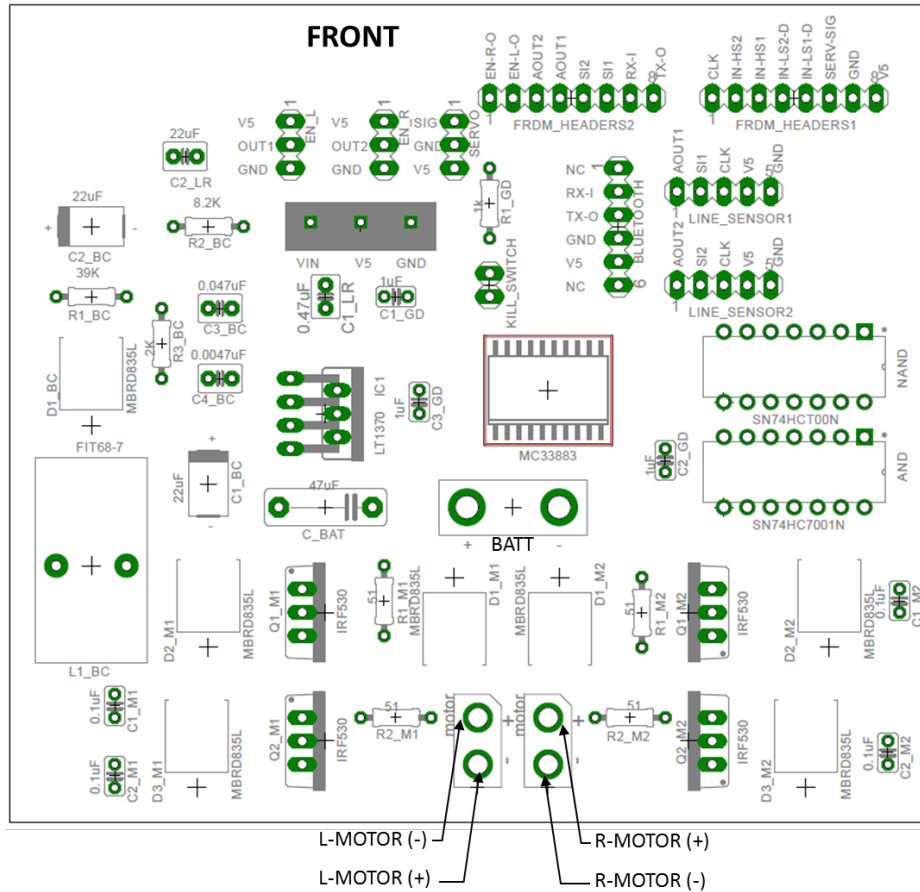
Labeled car driver PCB. FRONT designates mounting orientation on car.
